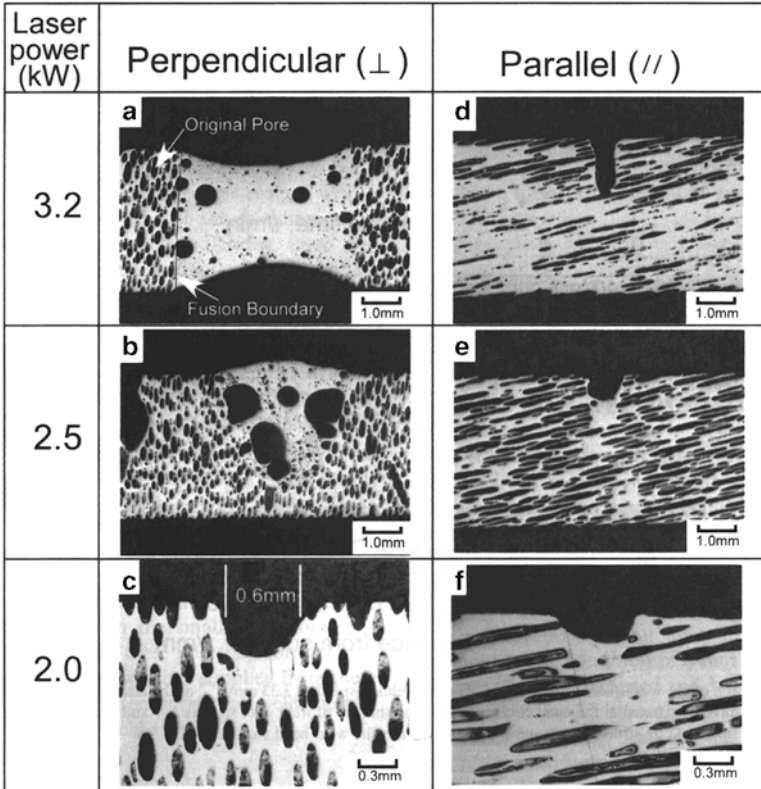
Cross sections of laser weld perpendicular to the welding direction in 4-mm thickness in the welding speed of 3.33 mm s^{-1} at the laser beam power of 3.2, 2.5, and 2.0 kW (a–c) perpendicular and (d–f) parallel to the pore growth directions, which are slightly inclined to the work piece surface with about 10° (Reprinted with permission from [4] © 2003 Elsevier Science B.V.)
